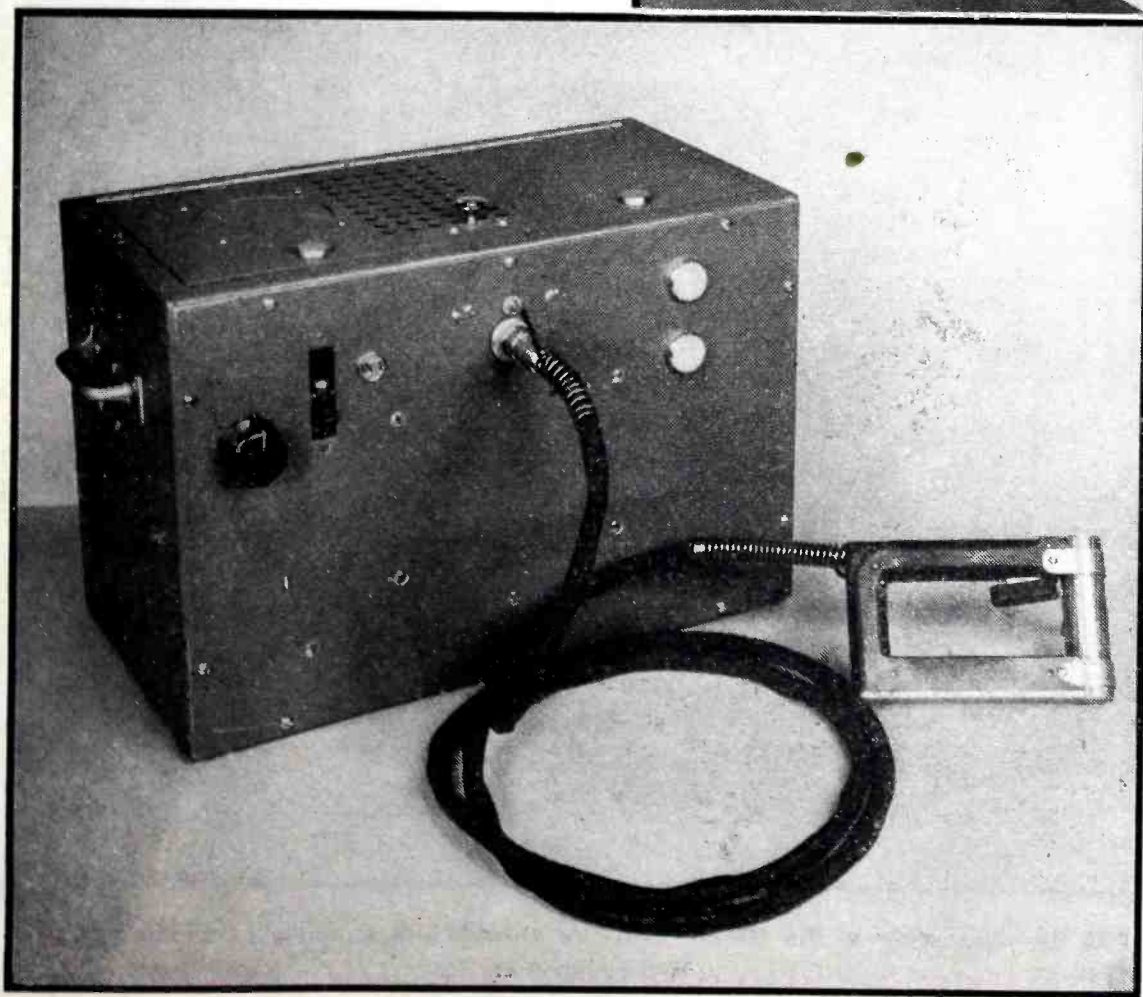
Model of the spot-gluer used in field tests. The oscillator cabinet has a plug-in cable connector so that several different models of the gun may be used interchangeably. The gun shown is the one developed especially for veneer wrapping, and permits an ironing motion for smoothing wrinkles in the veneer
